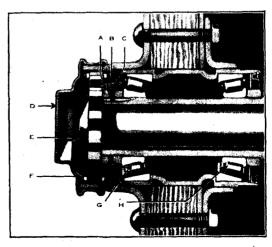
Sectional view of rear wheel hub, showing bearings
